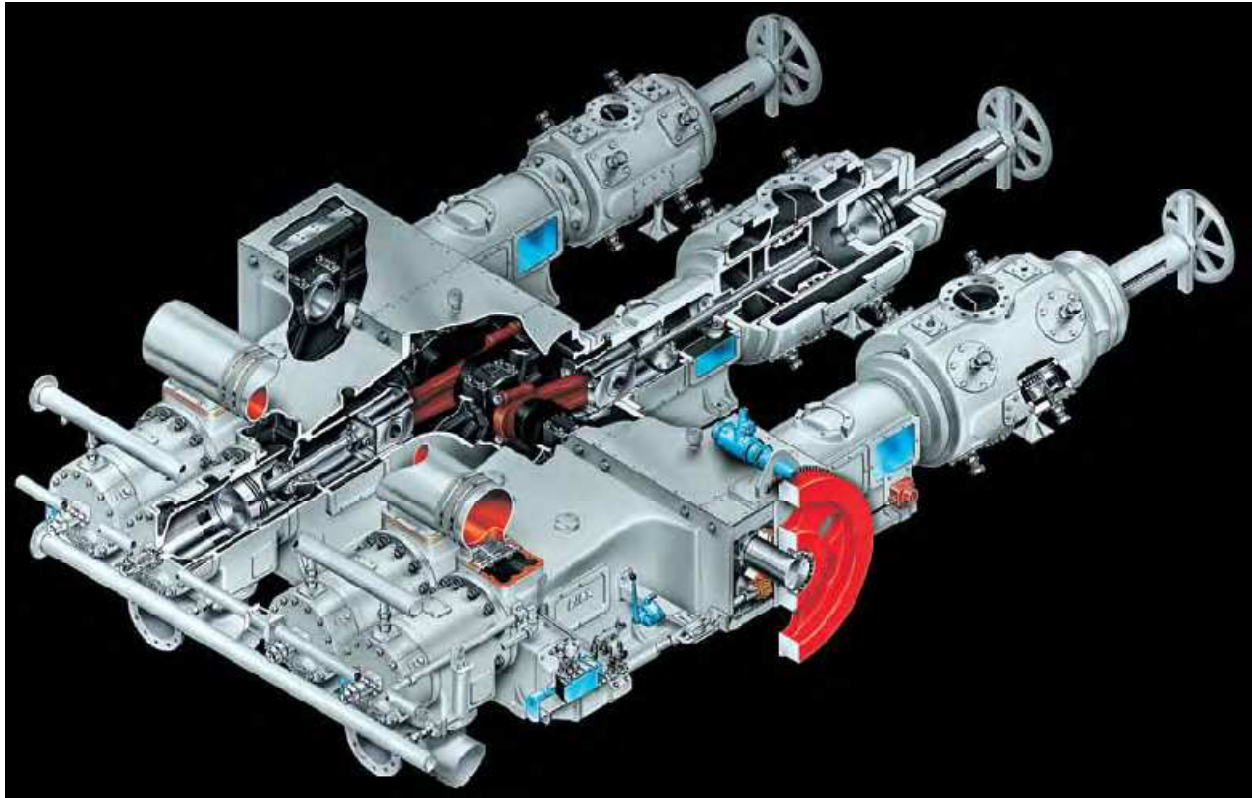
Figure B – Integral compressor frame and cylinders (engine power cylinders are on left and compressor cylinders on right)
